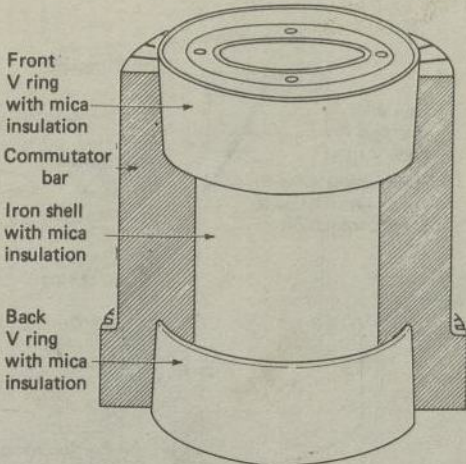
A commutator with half the bars removed and the front and back V ring in place.
